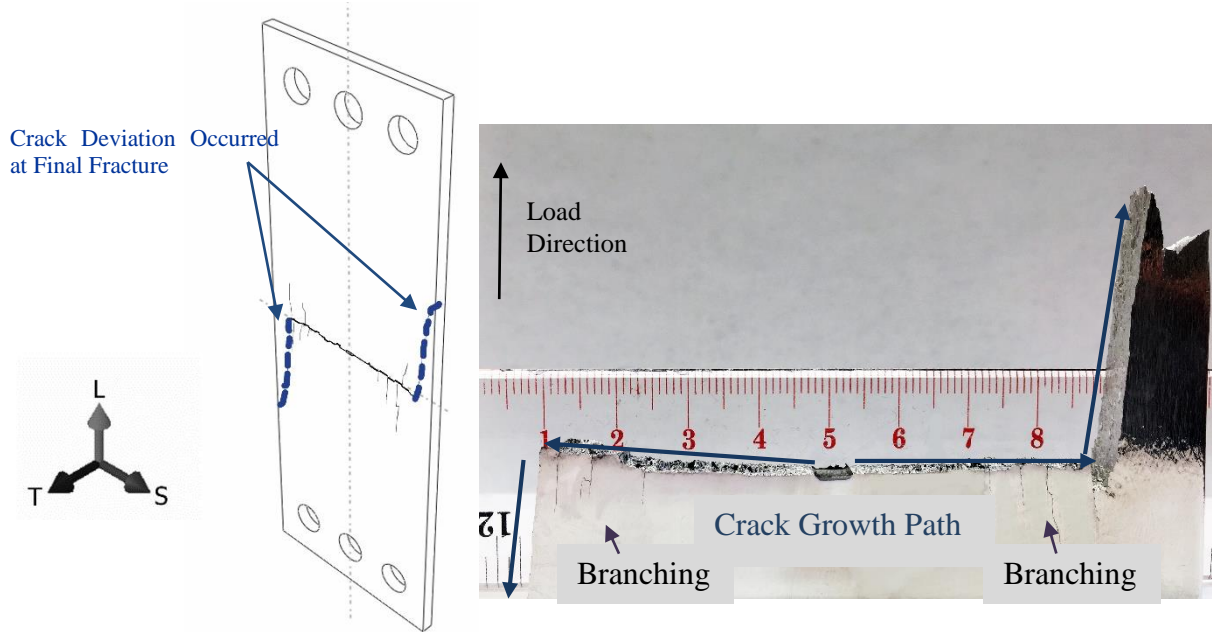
The fractured middle tension specimen of 7050-T7651.
